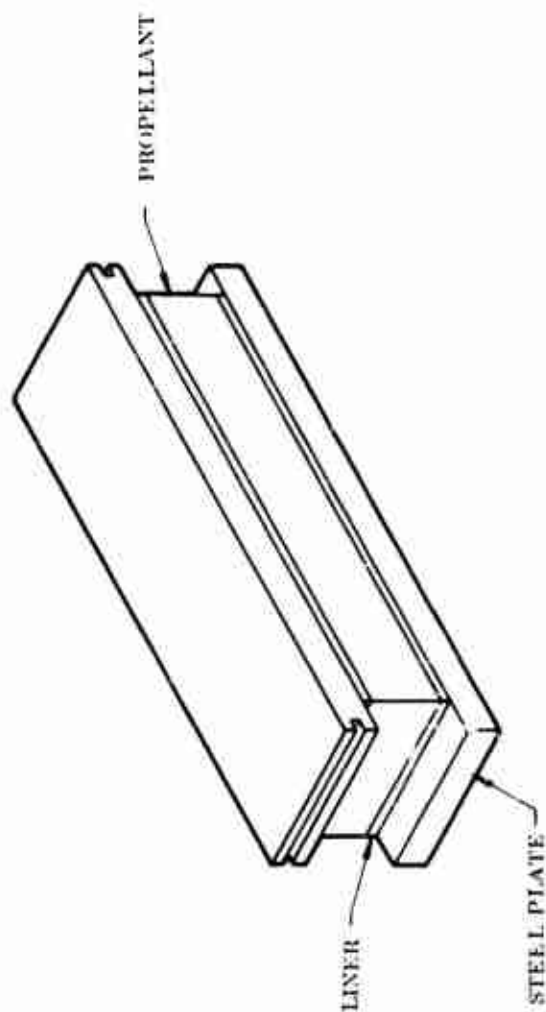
180 Degree Peel Test Specimen and Arrangement
